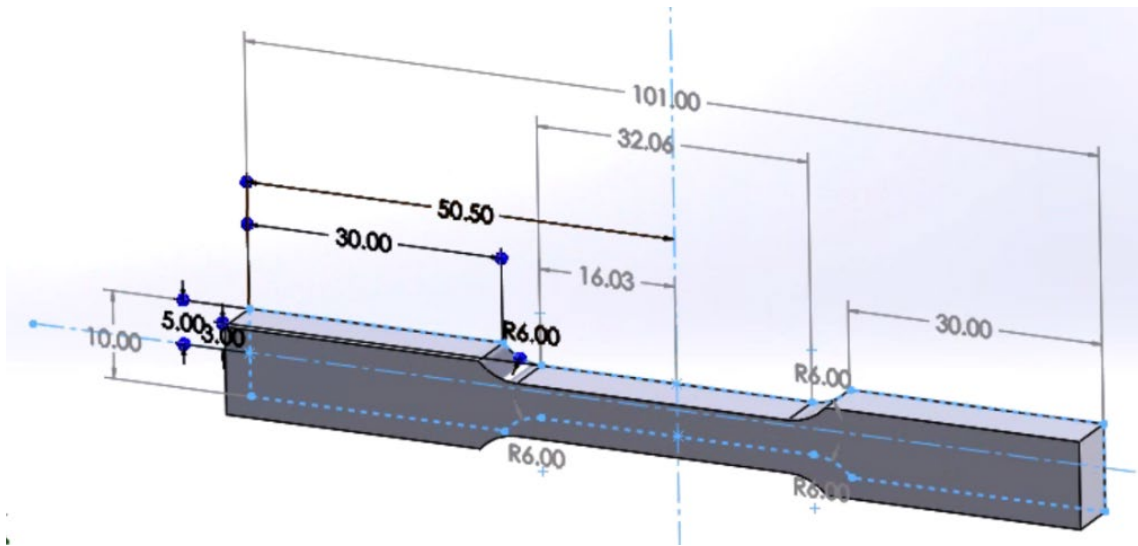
Dimensions of Subsize Specimens per ASTM E8/E8M Standard in Millimeters.
